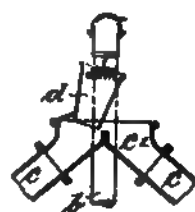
Details of the Principal Parts of Fig. 379, in Front and Side Views.
